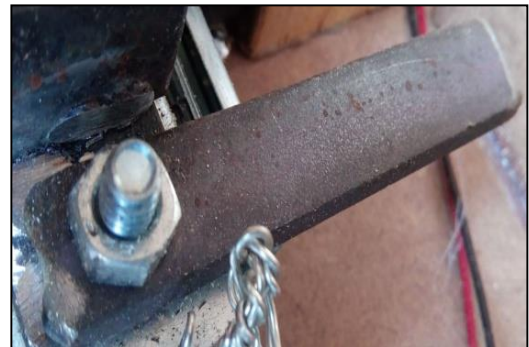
Welding of Rack on Iron Strip
